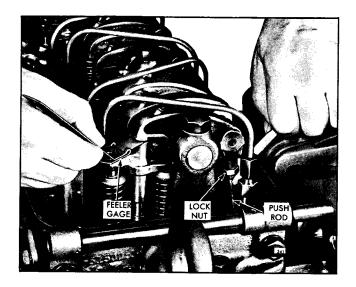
Adjusting Valve Clearance (Unloaded Valve Bridge)
